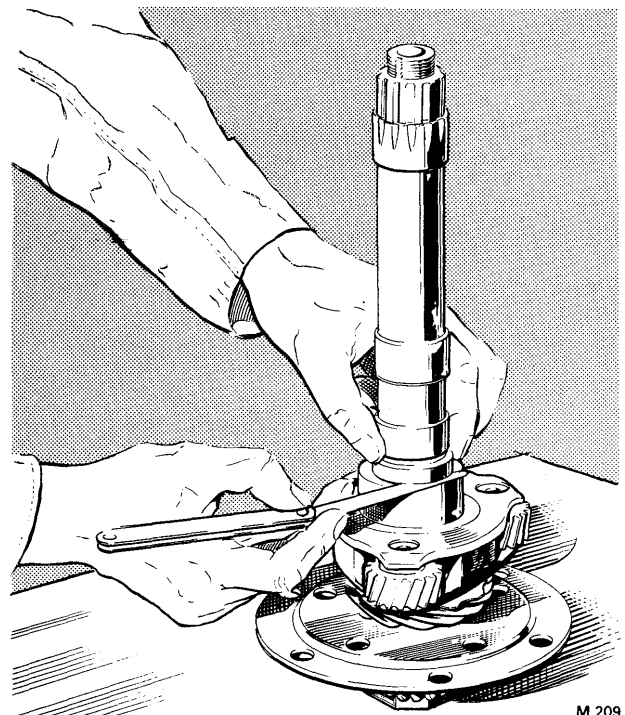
CHECKING THE REVERSE PLANET CARRIER END FLOAT
